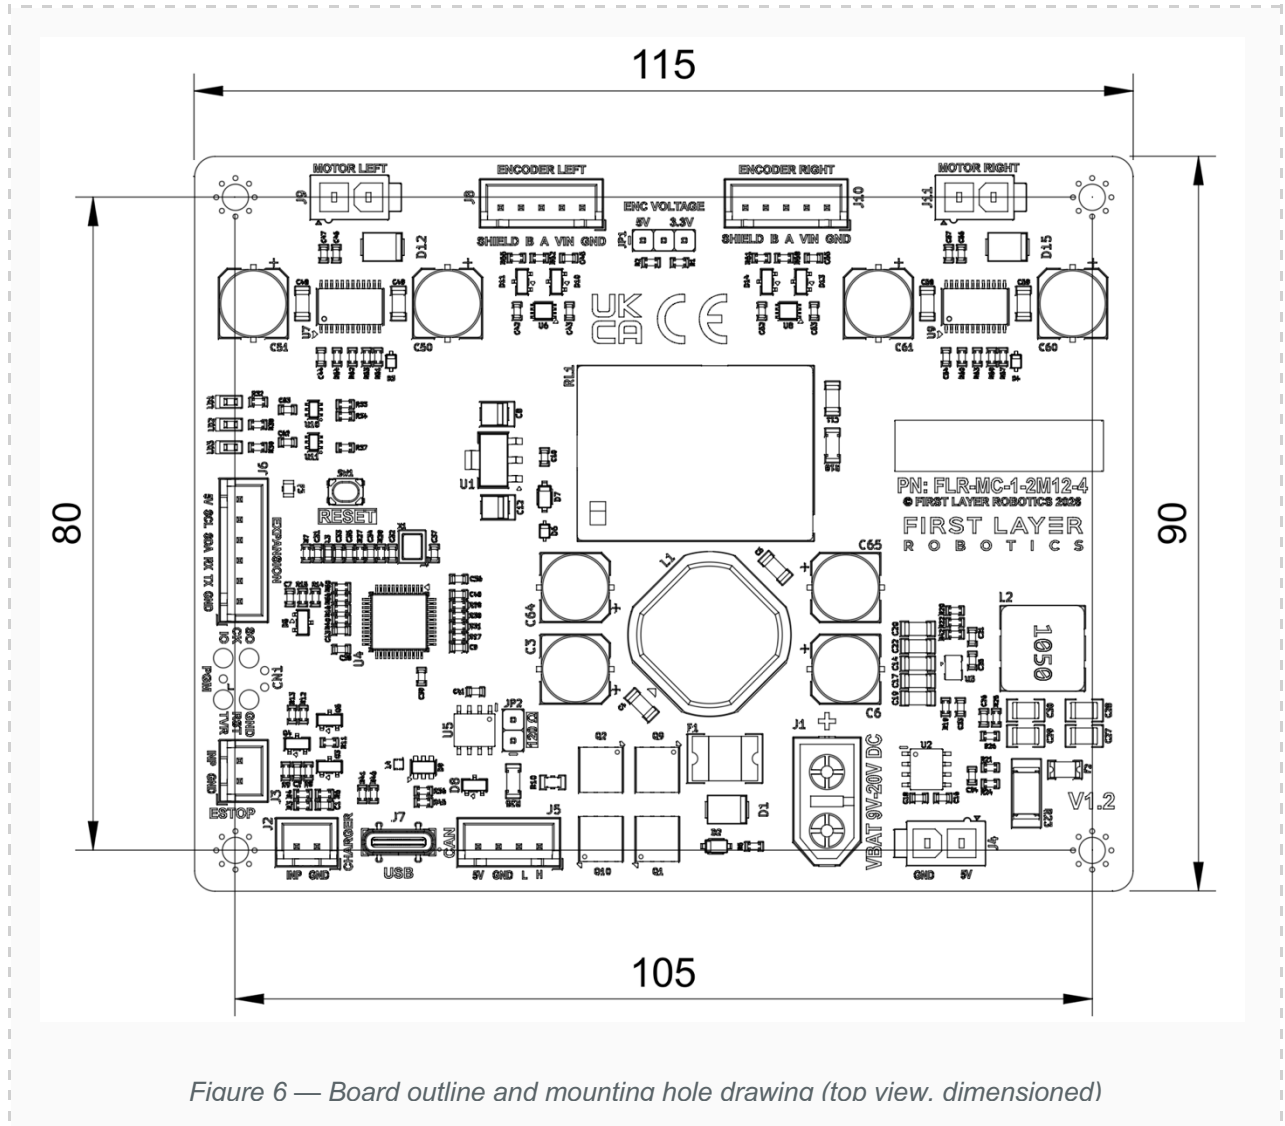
Board outline and mounting hole drawing (top view, dimensioned)
